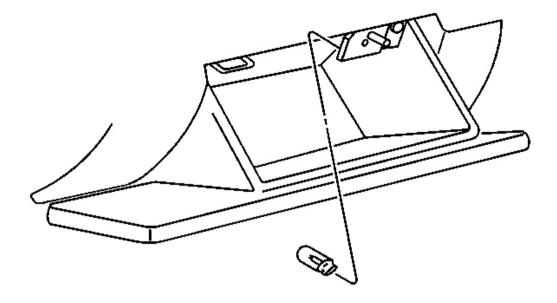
IP Passenger Compartment Door Courtesy of GENERAL MOTORS CORP.
